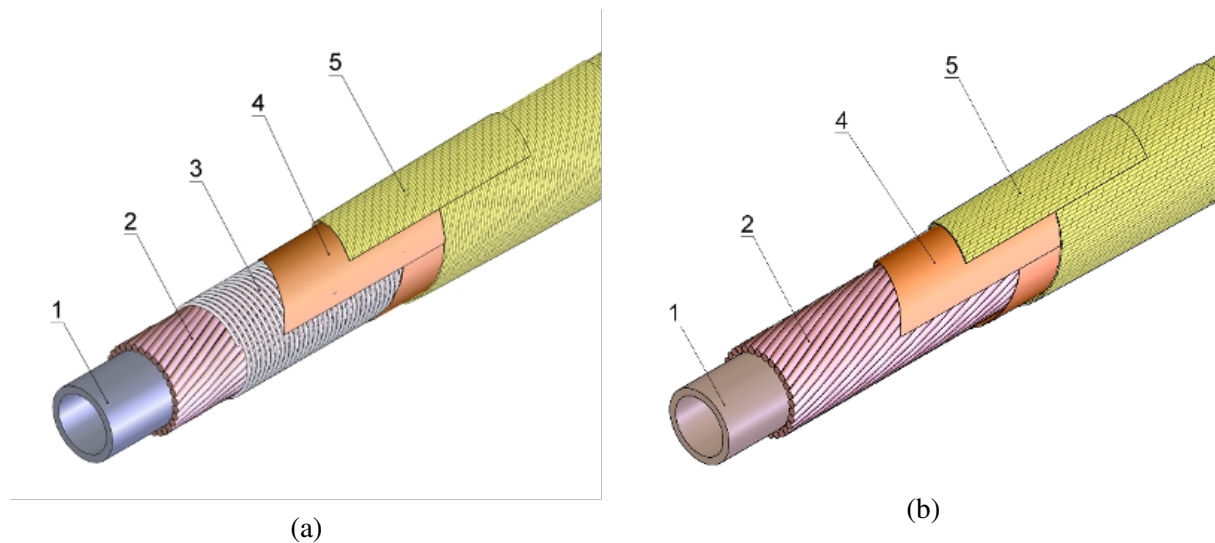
(a) Hollow SC cable of the Nuclotron and (b) the SPD solenoid: 1 – a tube with a channel for cooling; 2 – SC wire; 3 – fixing wire; 4 – polyimide tape; 5 – glass fiber tape impregnated with epoxy compound for hot hardening.
